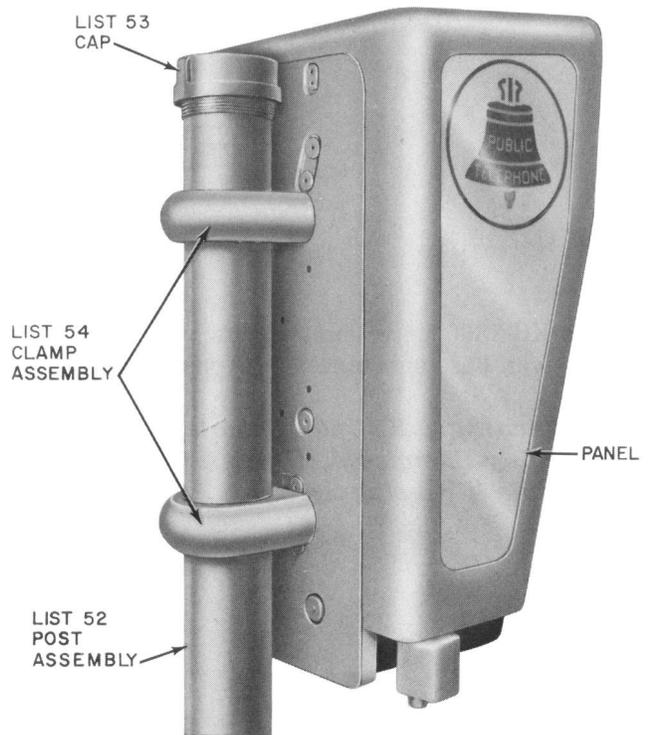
KS-16705 Mounting, Fastened to Mounting Post
